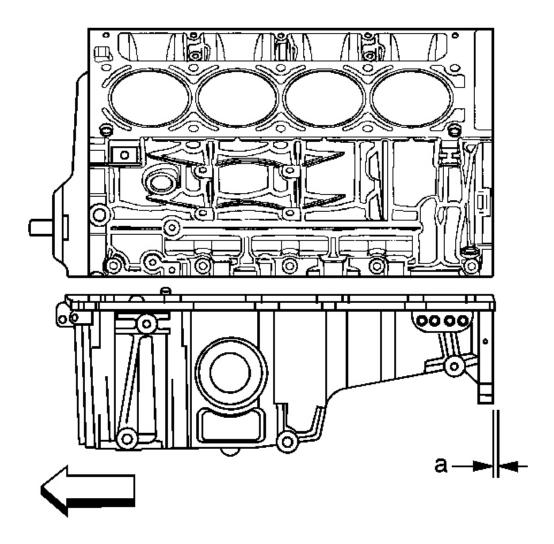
Aligning Rear Of Oil Pan & Rear Of Engine Block Courtesy of GENERAL MOTORS CORP.
